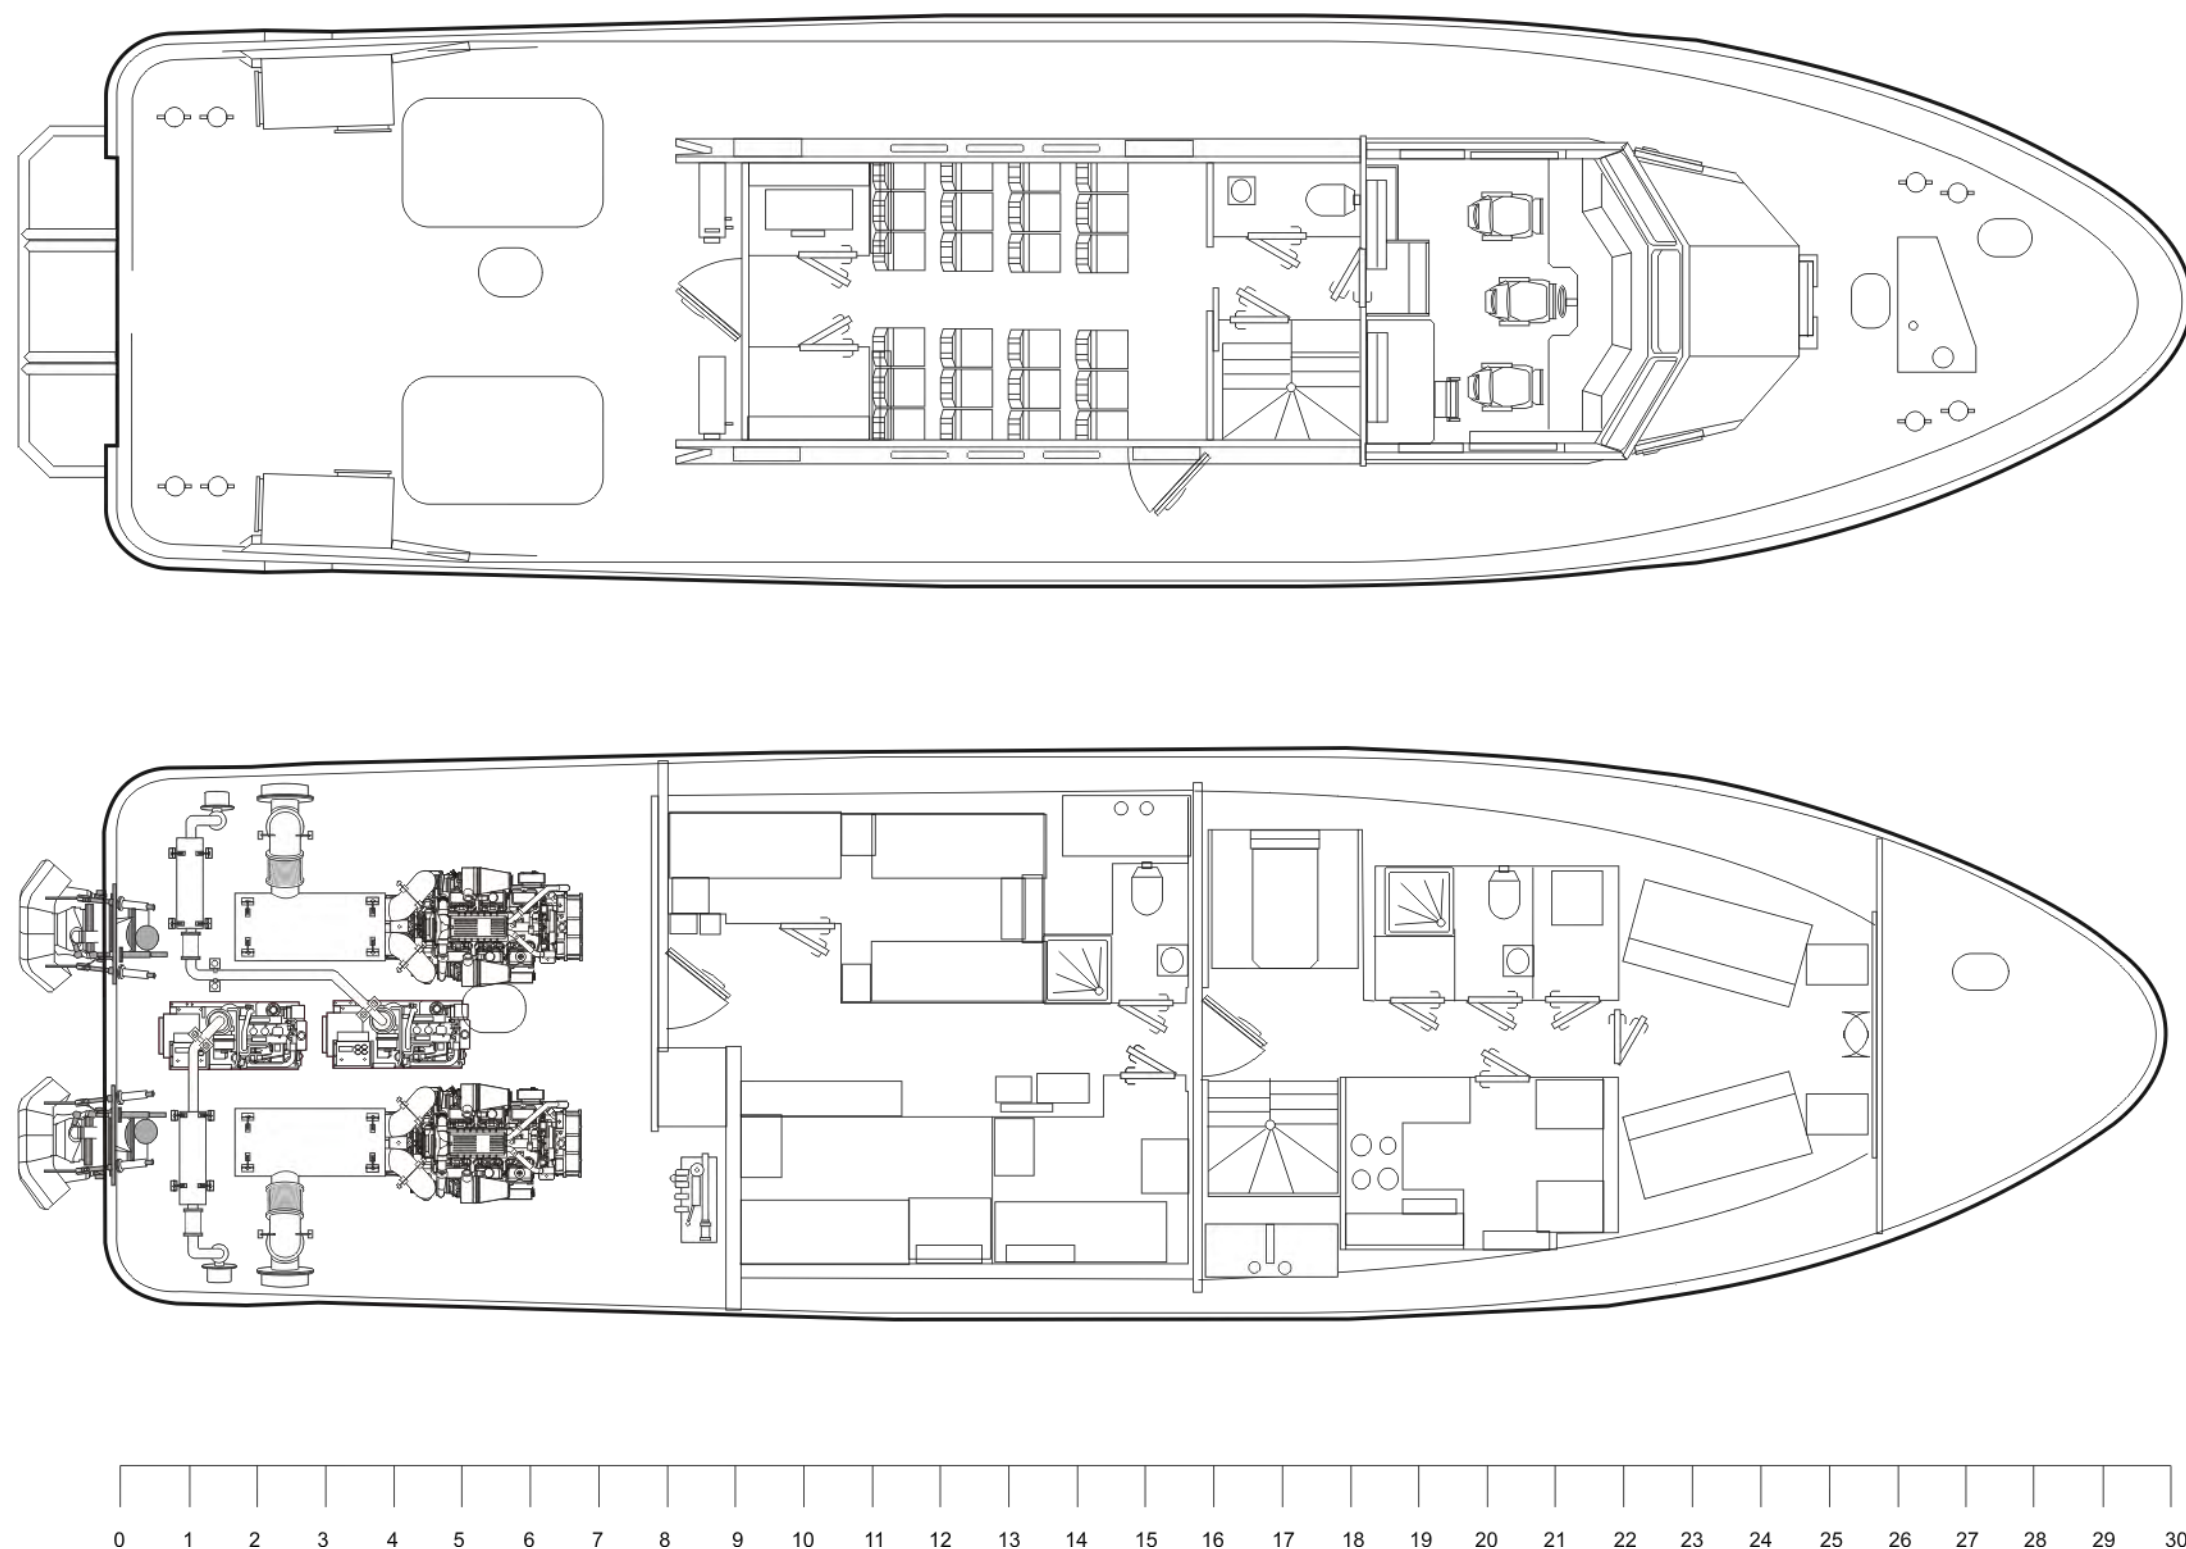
General Arrangement I.H. Pepple Fast Crew Boat Main and First Decks
